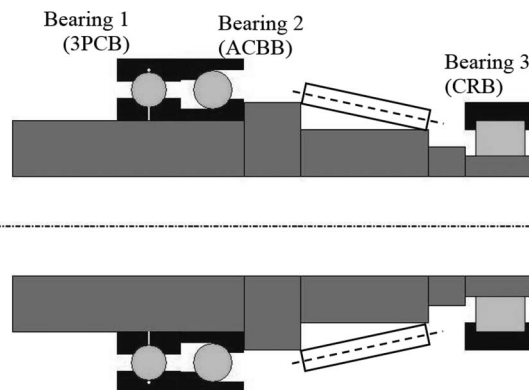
2D illustration of a generic helicopter high-speed shaft supported by a duplex tandem ball bearing and a CRB.
